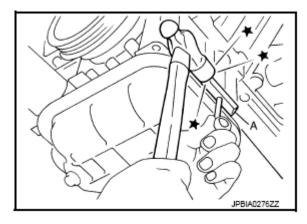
Inserting Seal Cutter Between Oil Pan (Upper) And Oil Pan (Lower) Courtesy of NISSAN NORTH AMERICA, INC.
